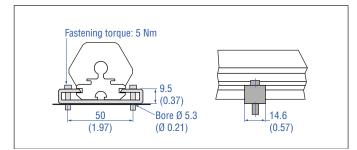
Mounting clamps (part no. 400 802) with cylinder screw M5×20
